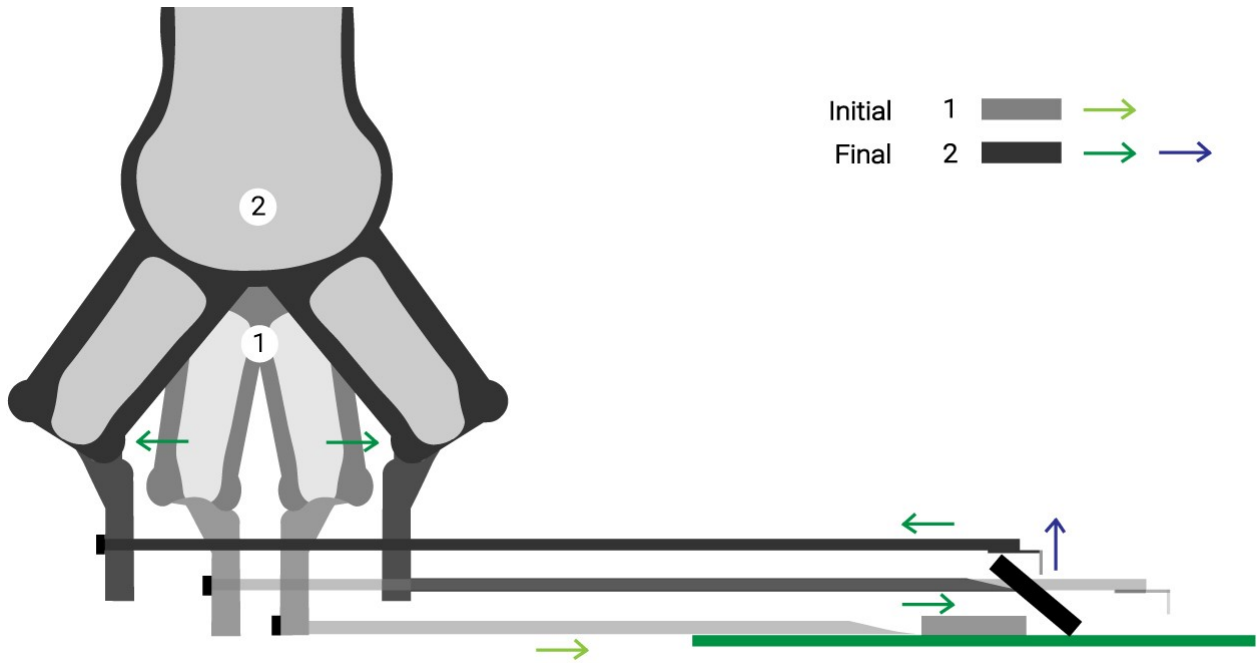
Schematic of the push-pull mechanism of the developed tool.
